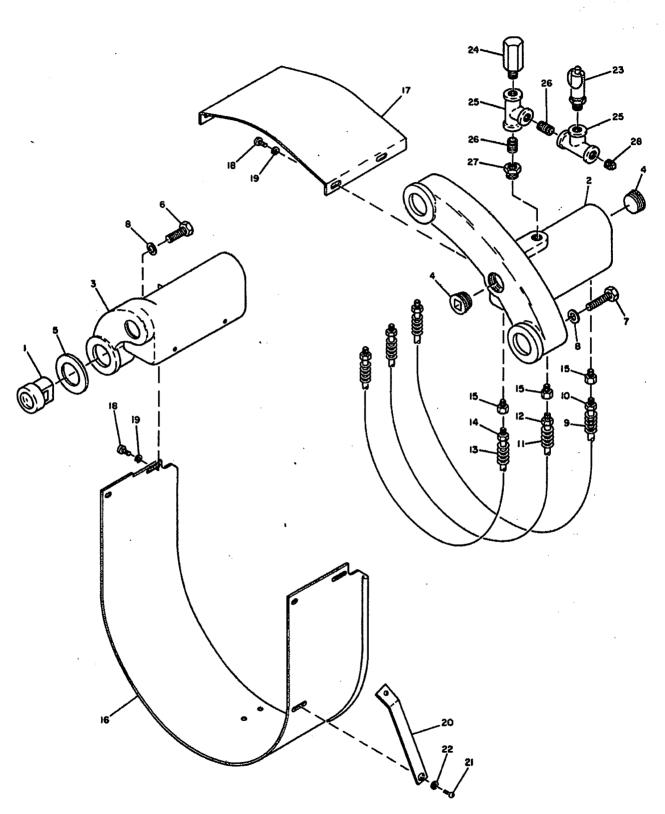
AIR INTERCOOLER ASSEMBLY
